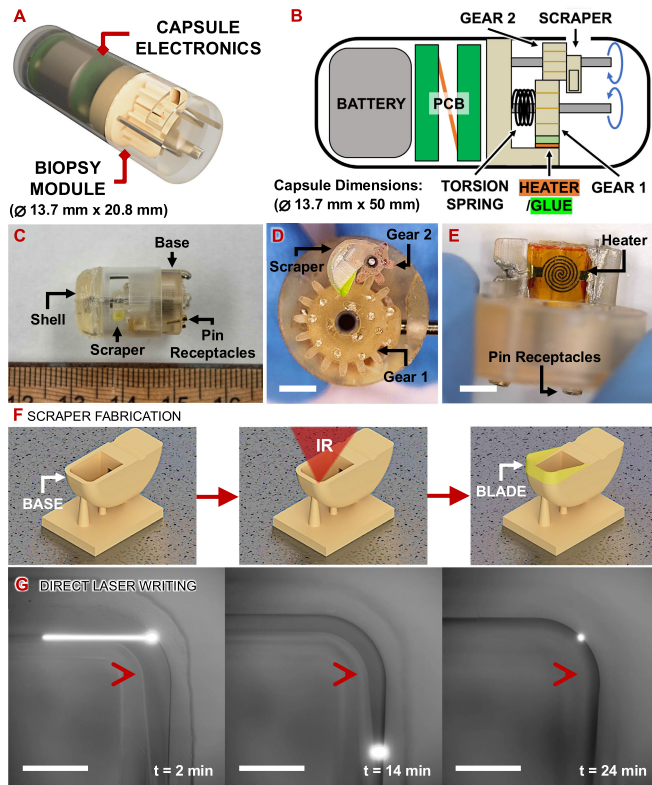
(A) CAD rendering depicting a SCUUP module integrated with wireless capsule electronics. (B) A 2-dimensional schematic of the SCUUP integrated capsule. (C) Photograph of the SCUUP module (final dimensions: ϕ 13.7 mm x 20.8 mm). (D) Pictures of the internal gear mechanism and (E) integrated Au heater for triggering. (scalebars: 3 mm) (F) Renderings depicting the fabrication process of the scraping tool. (G) Images depicting the 2-Photon Polymerization 3D-printing process of the scrapers. The red arrow indicates the position of the blade during printing (scalebars: 500 μ m).
